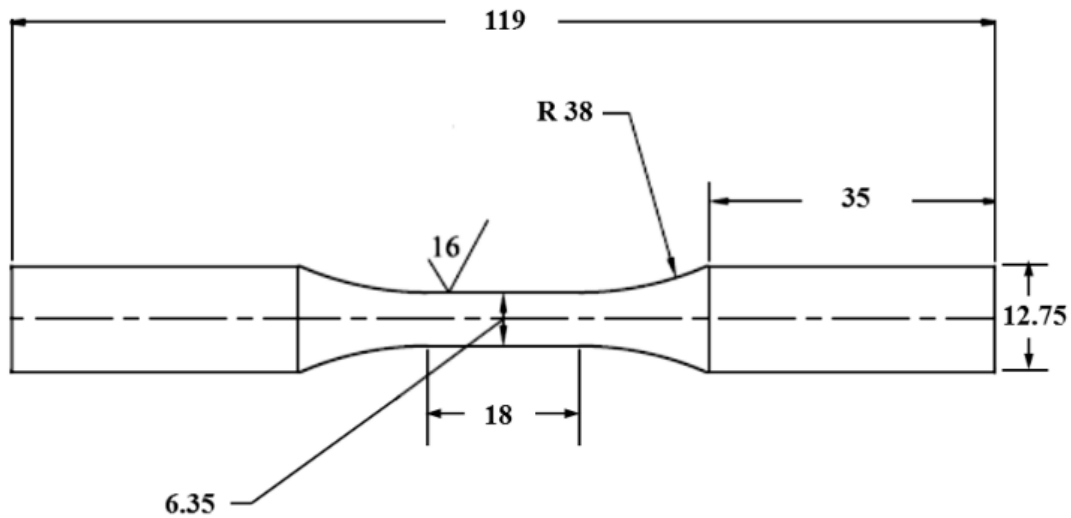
Specimen geometry and dimensions for uniaxial monotonic tensile and fatigue tests (dimensions in mm).
